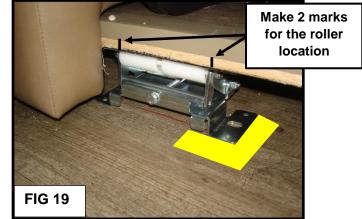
Yellow shape represents tape marking bracket location. FIG 19: Make two marks on the front edge of the slide out wood strip indicating location of the roller.
